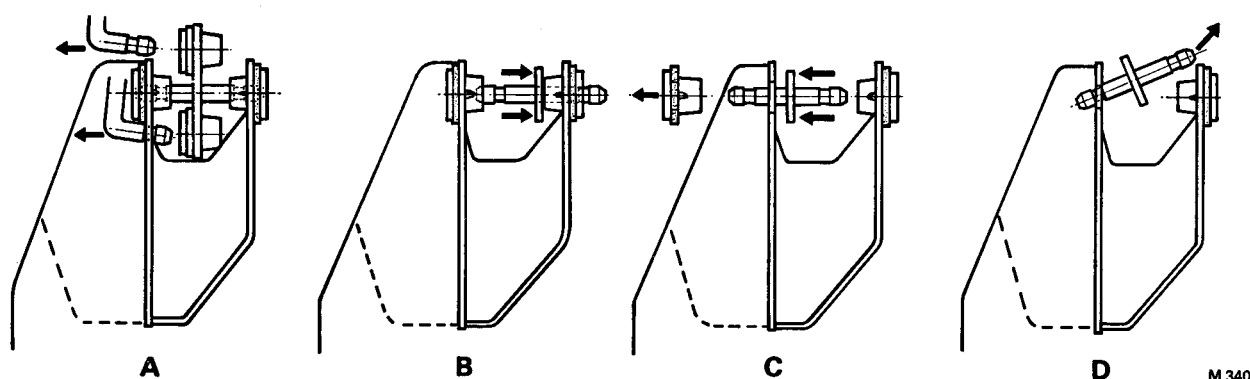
REMOVING A PIVOT LEVER ASSEMBLY FROM THE FRONT DOOR BRACKET
